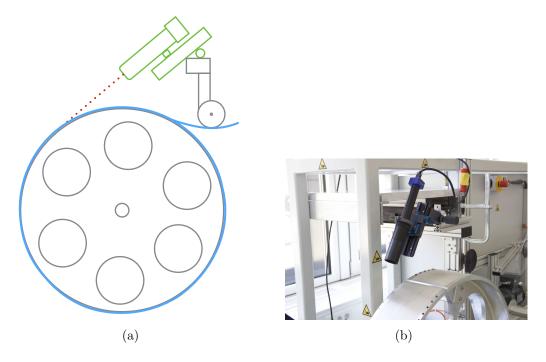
Left: Scheme of the camera setup on the winding machine. The camera (green) will be placed on the same slide as the positioning spool and look tangential on the wheel. Right: Camera setup mounted on the winding machine.
